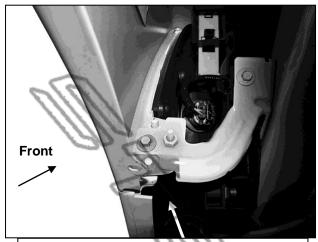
Release clips (arrow) to remove air dam (pictured from behind bumper-tow hook equipped)
